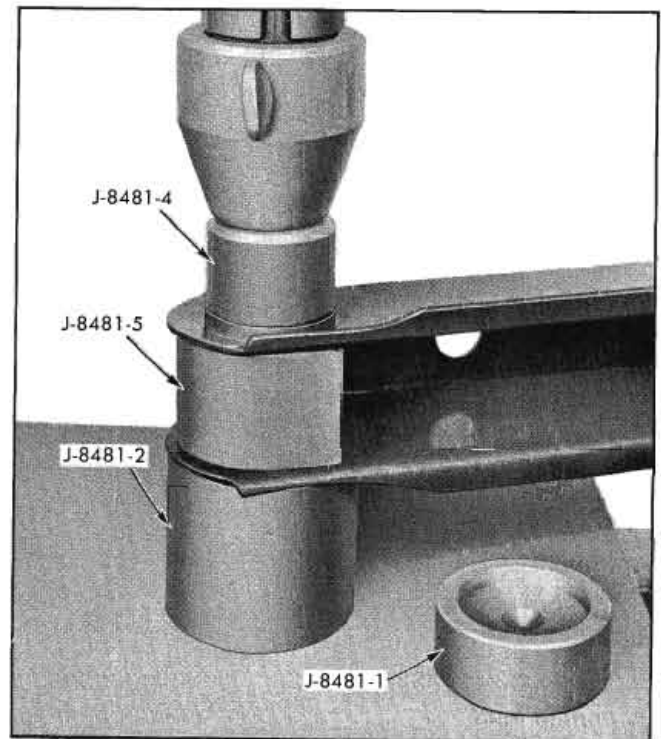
Removing Rear Upper and Lower Control Arm Bushing
